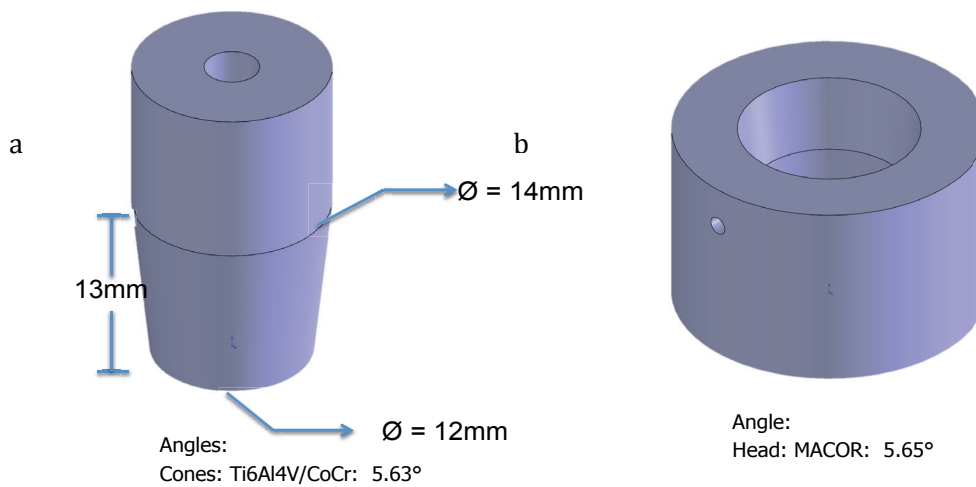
a) Design and b) assembly of metallic taper and ceramic head samples.
